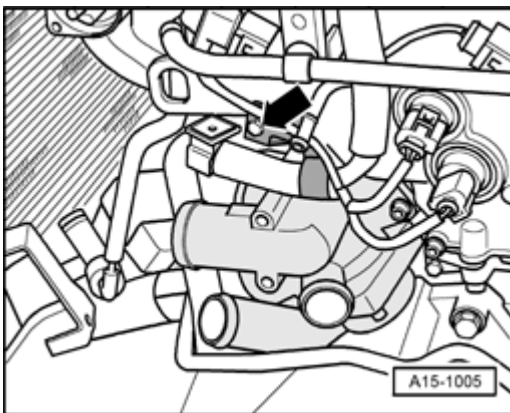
Removing Bolt On Bracket For Wiring Harness
